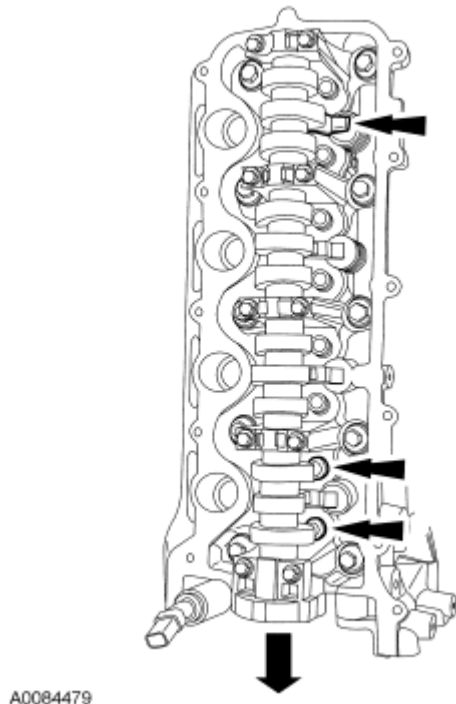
Locating LH Cylinder Head Camshaft Roller Followers And Bolts
